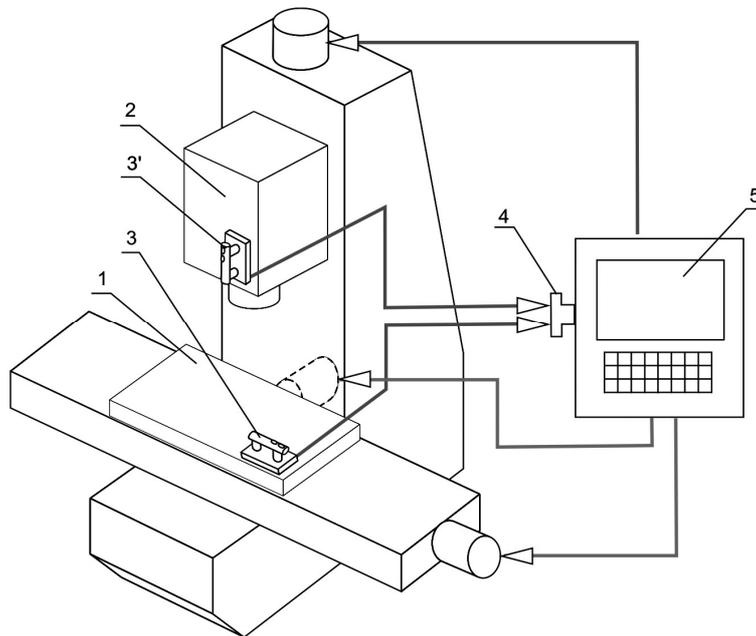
The idea of manual movement of machine tool body elements: 1 – table, 2 – head, 3 – lever to control the cross-table unit, 3' – lever for controlling the head, 4 – signal interface, 5 – open control system
